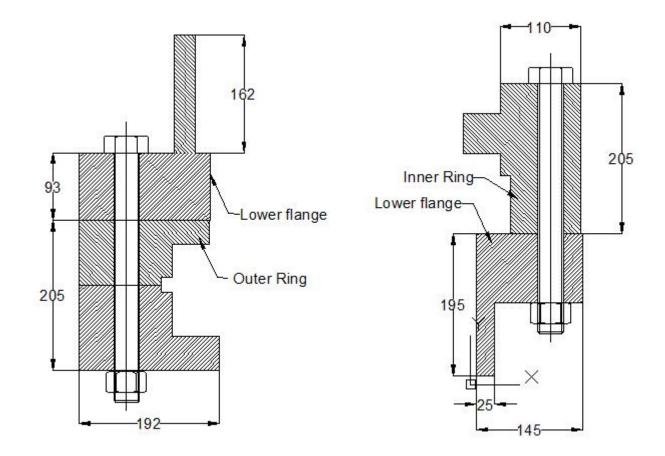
Geometrical properties for the slewing ring used (dimension is mm)
